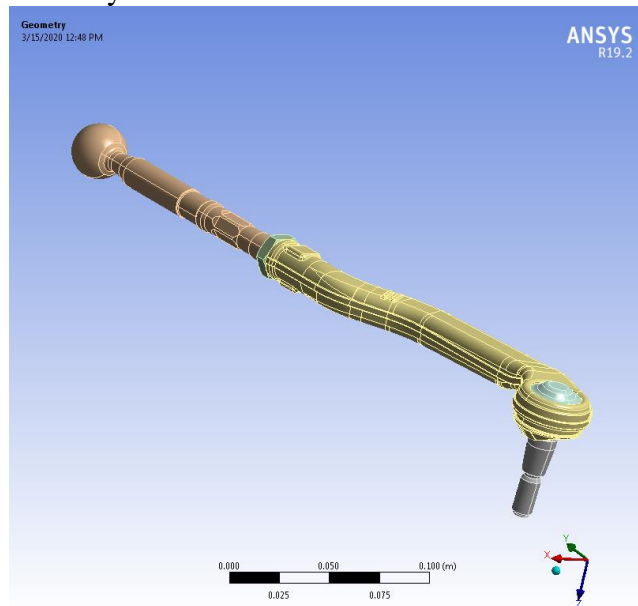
1 3D Geometry of the steering tie rod - tie rod end assembly
